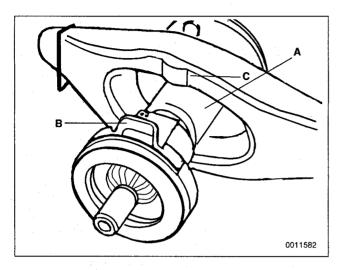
Clutch release bearing correctly installed on guide sleeve (A). Bearing tabs (B) align with contact points (C) on release lever.
